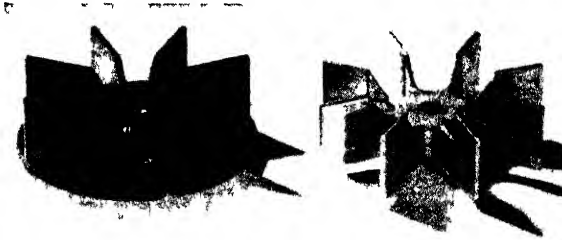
Molded impeller at left proved both better and cheaper than the one originally die cast as shown at right. Molded propeller being thicker and having blades supported by a flange is stiffer than die casting.
